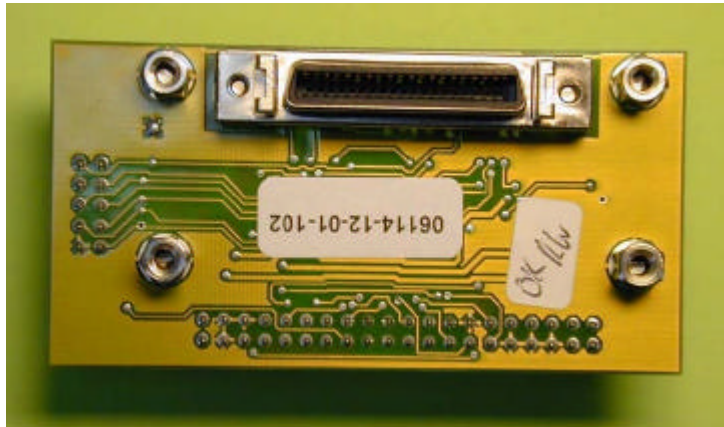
The LKONV-40-37 adapter board for backpanel mounting, in the lower section close to the edge, the two rows of soldered pins of the 40 pin header connector for the internal cable can be seen.
